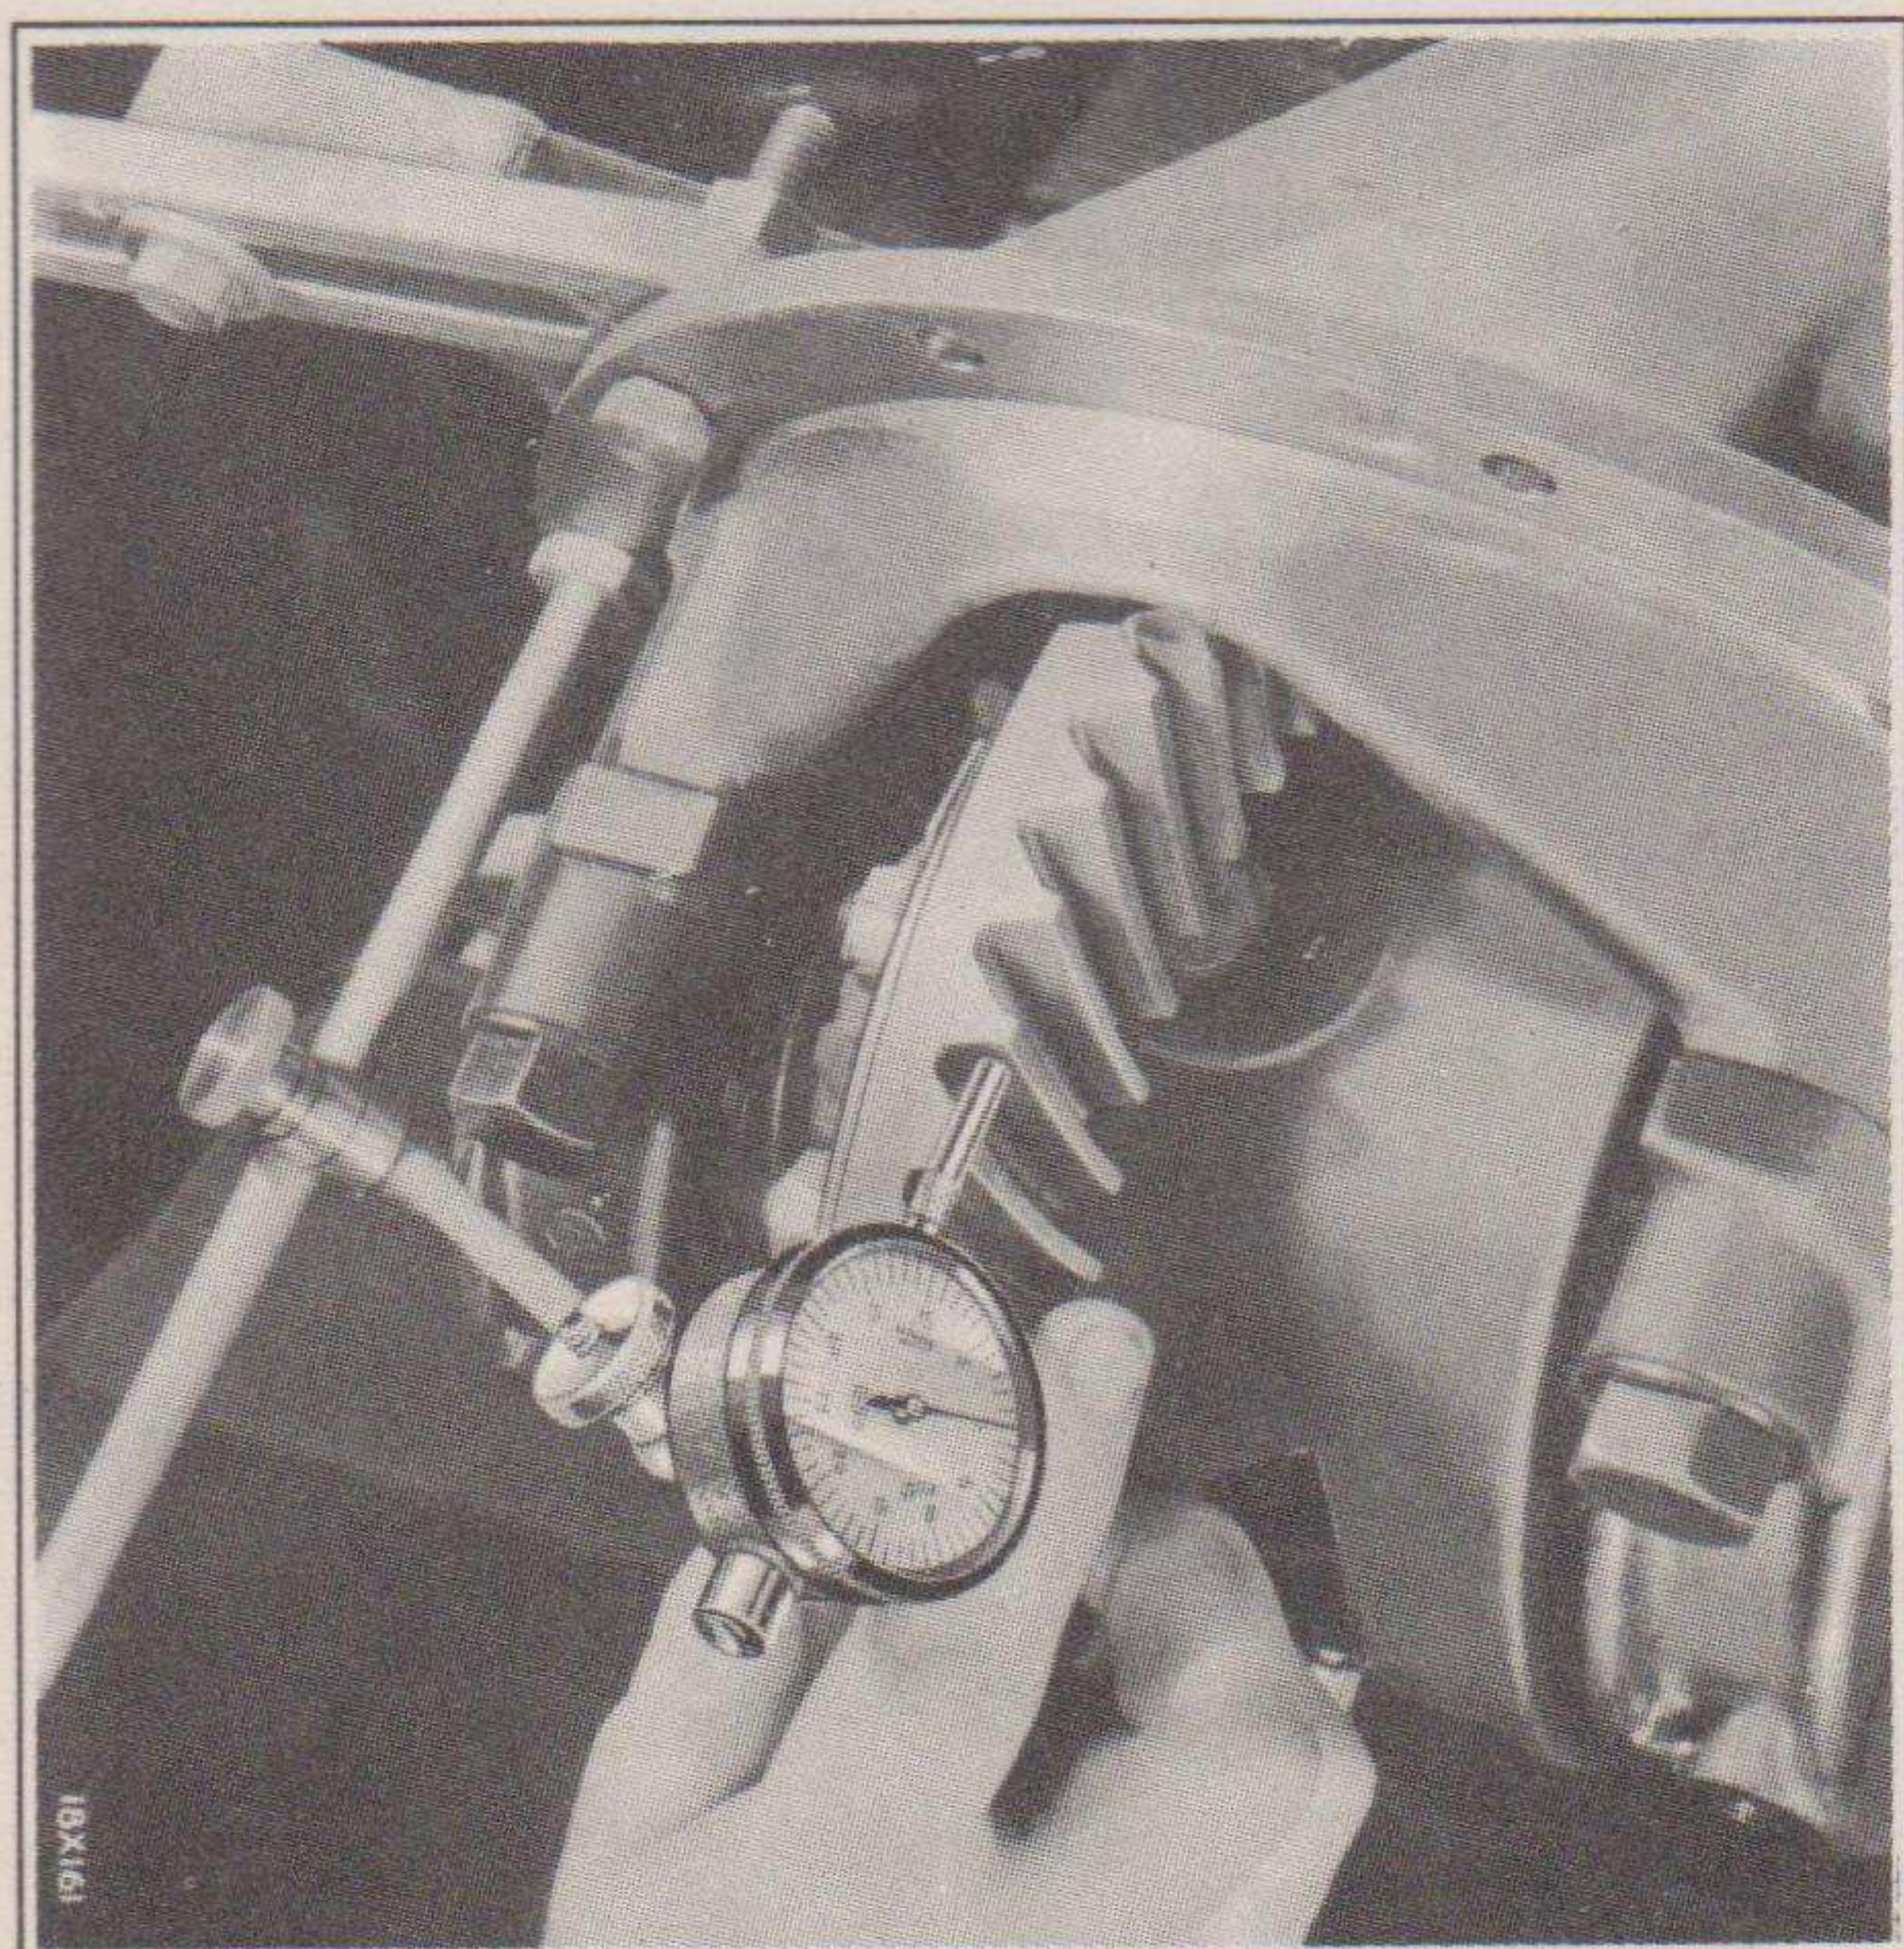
Checking Clearance Between Drive Gear and Pinion with Indicator (Tool C-430)
